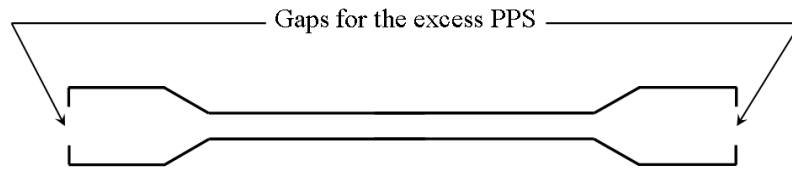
Example of a design for a mould for tensile test specimens with integrated chamfered tabs.
